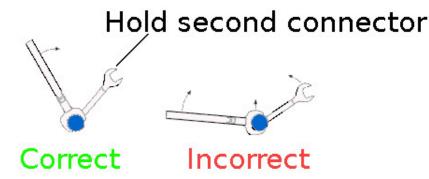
This shows how a torque spanner should be properly used. As one piece is tightened, the other pieces must be held so it does not rotate using a second spanner. The torque spanner and the other spanner should always be within 90° of each other.
